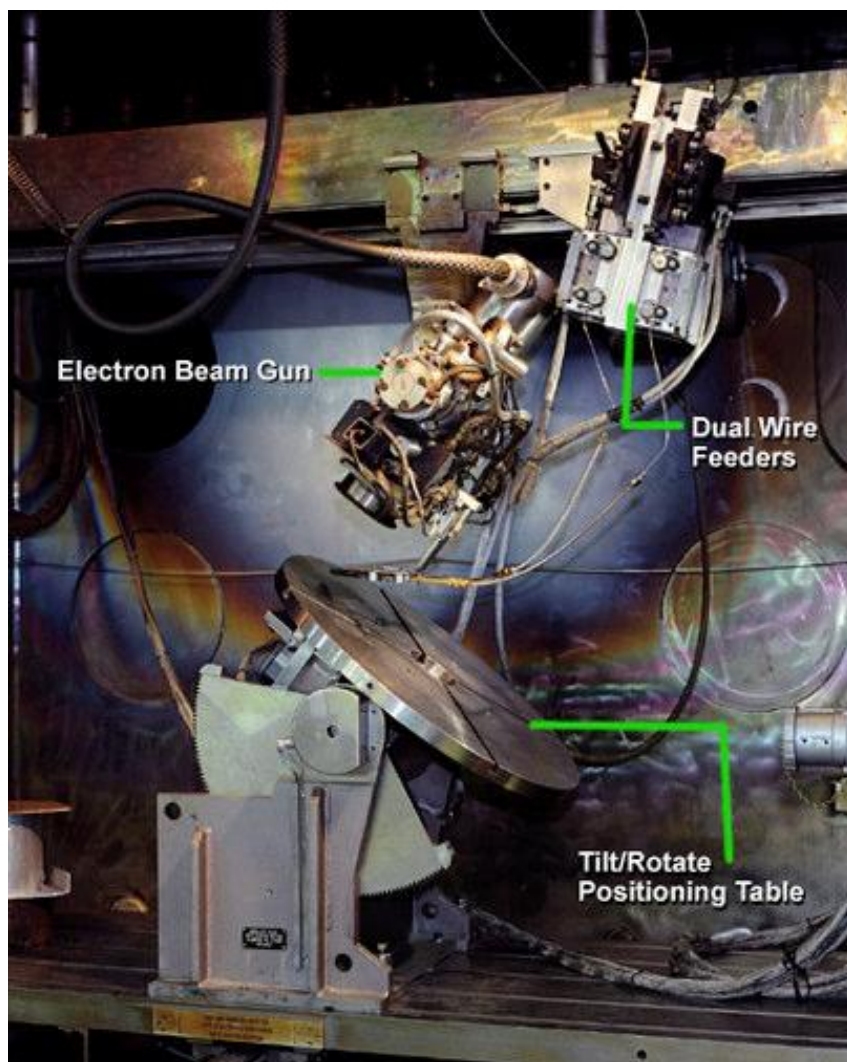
Inside View of the Large EBF^3 Machine¹[16]
